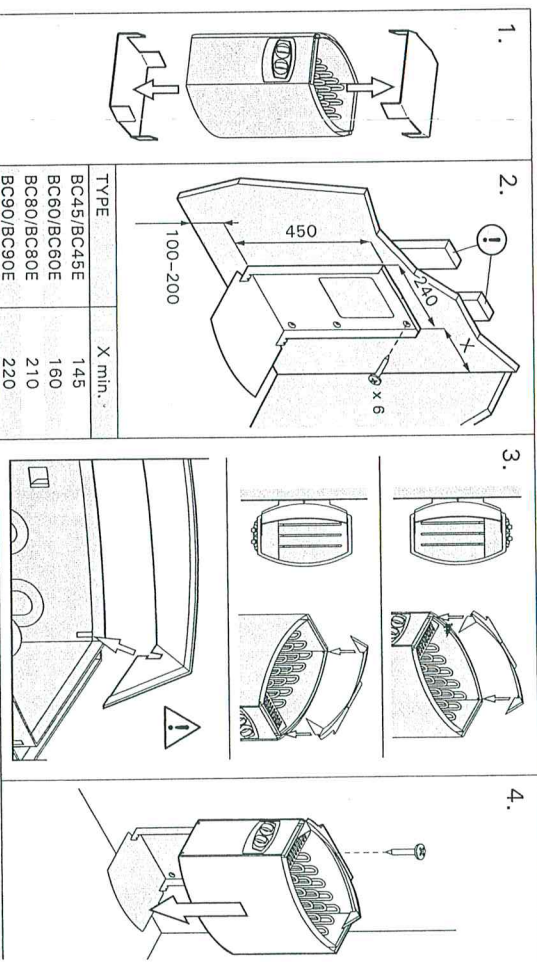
Fastening the heater on a wall (all dimensions in millimeters)
